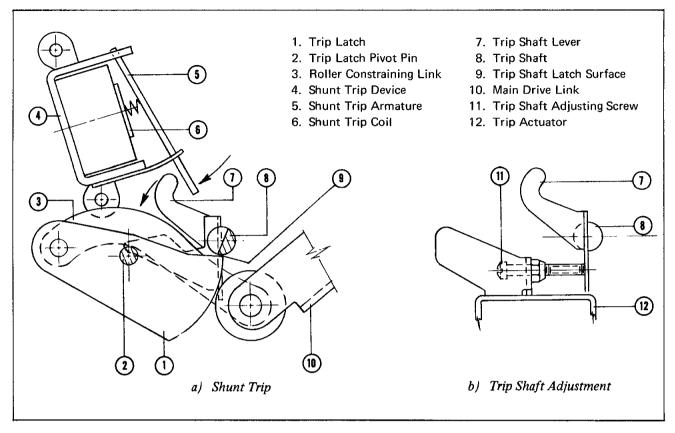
Shunt Trip Details Showing Trip Shaft Adjustment
